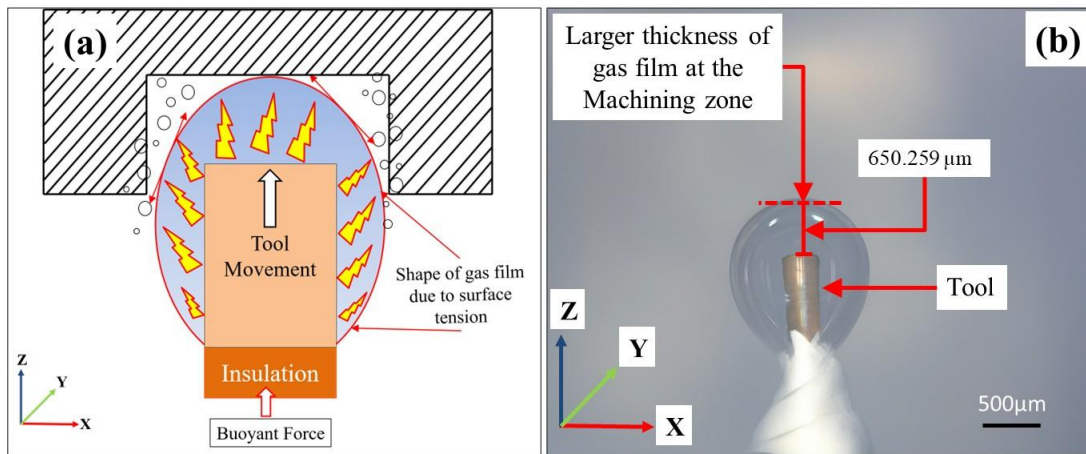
7 Shape of gas film due to surface tension and buoyant force for bottom tool feeding technique (a) Schematic View and (b) Photographic view
